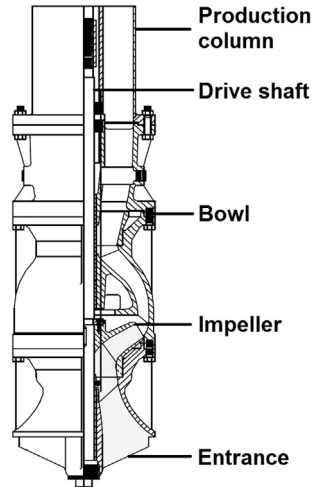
Detail of impeller-bowl assembly for an electric submersible pump.
